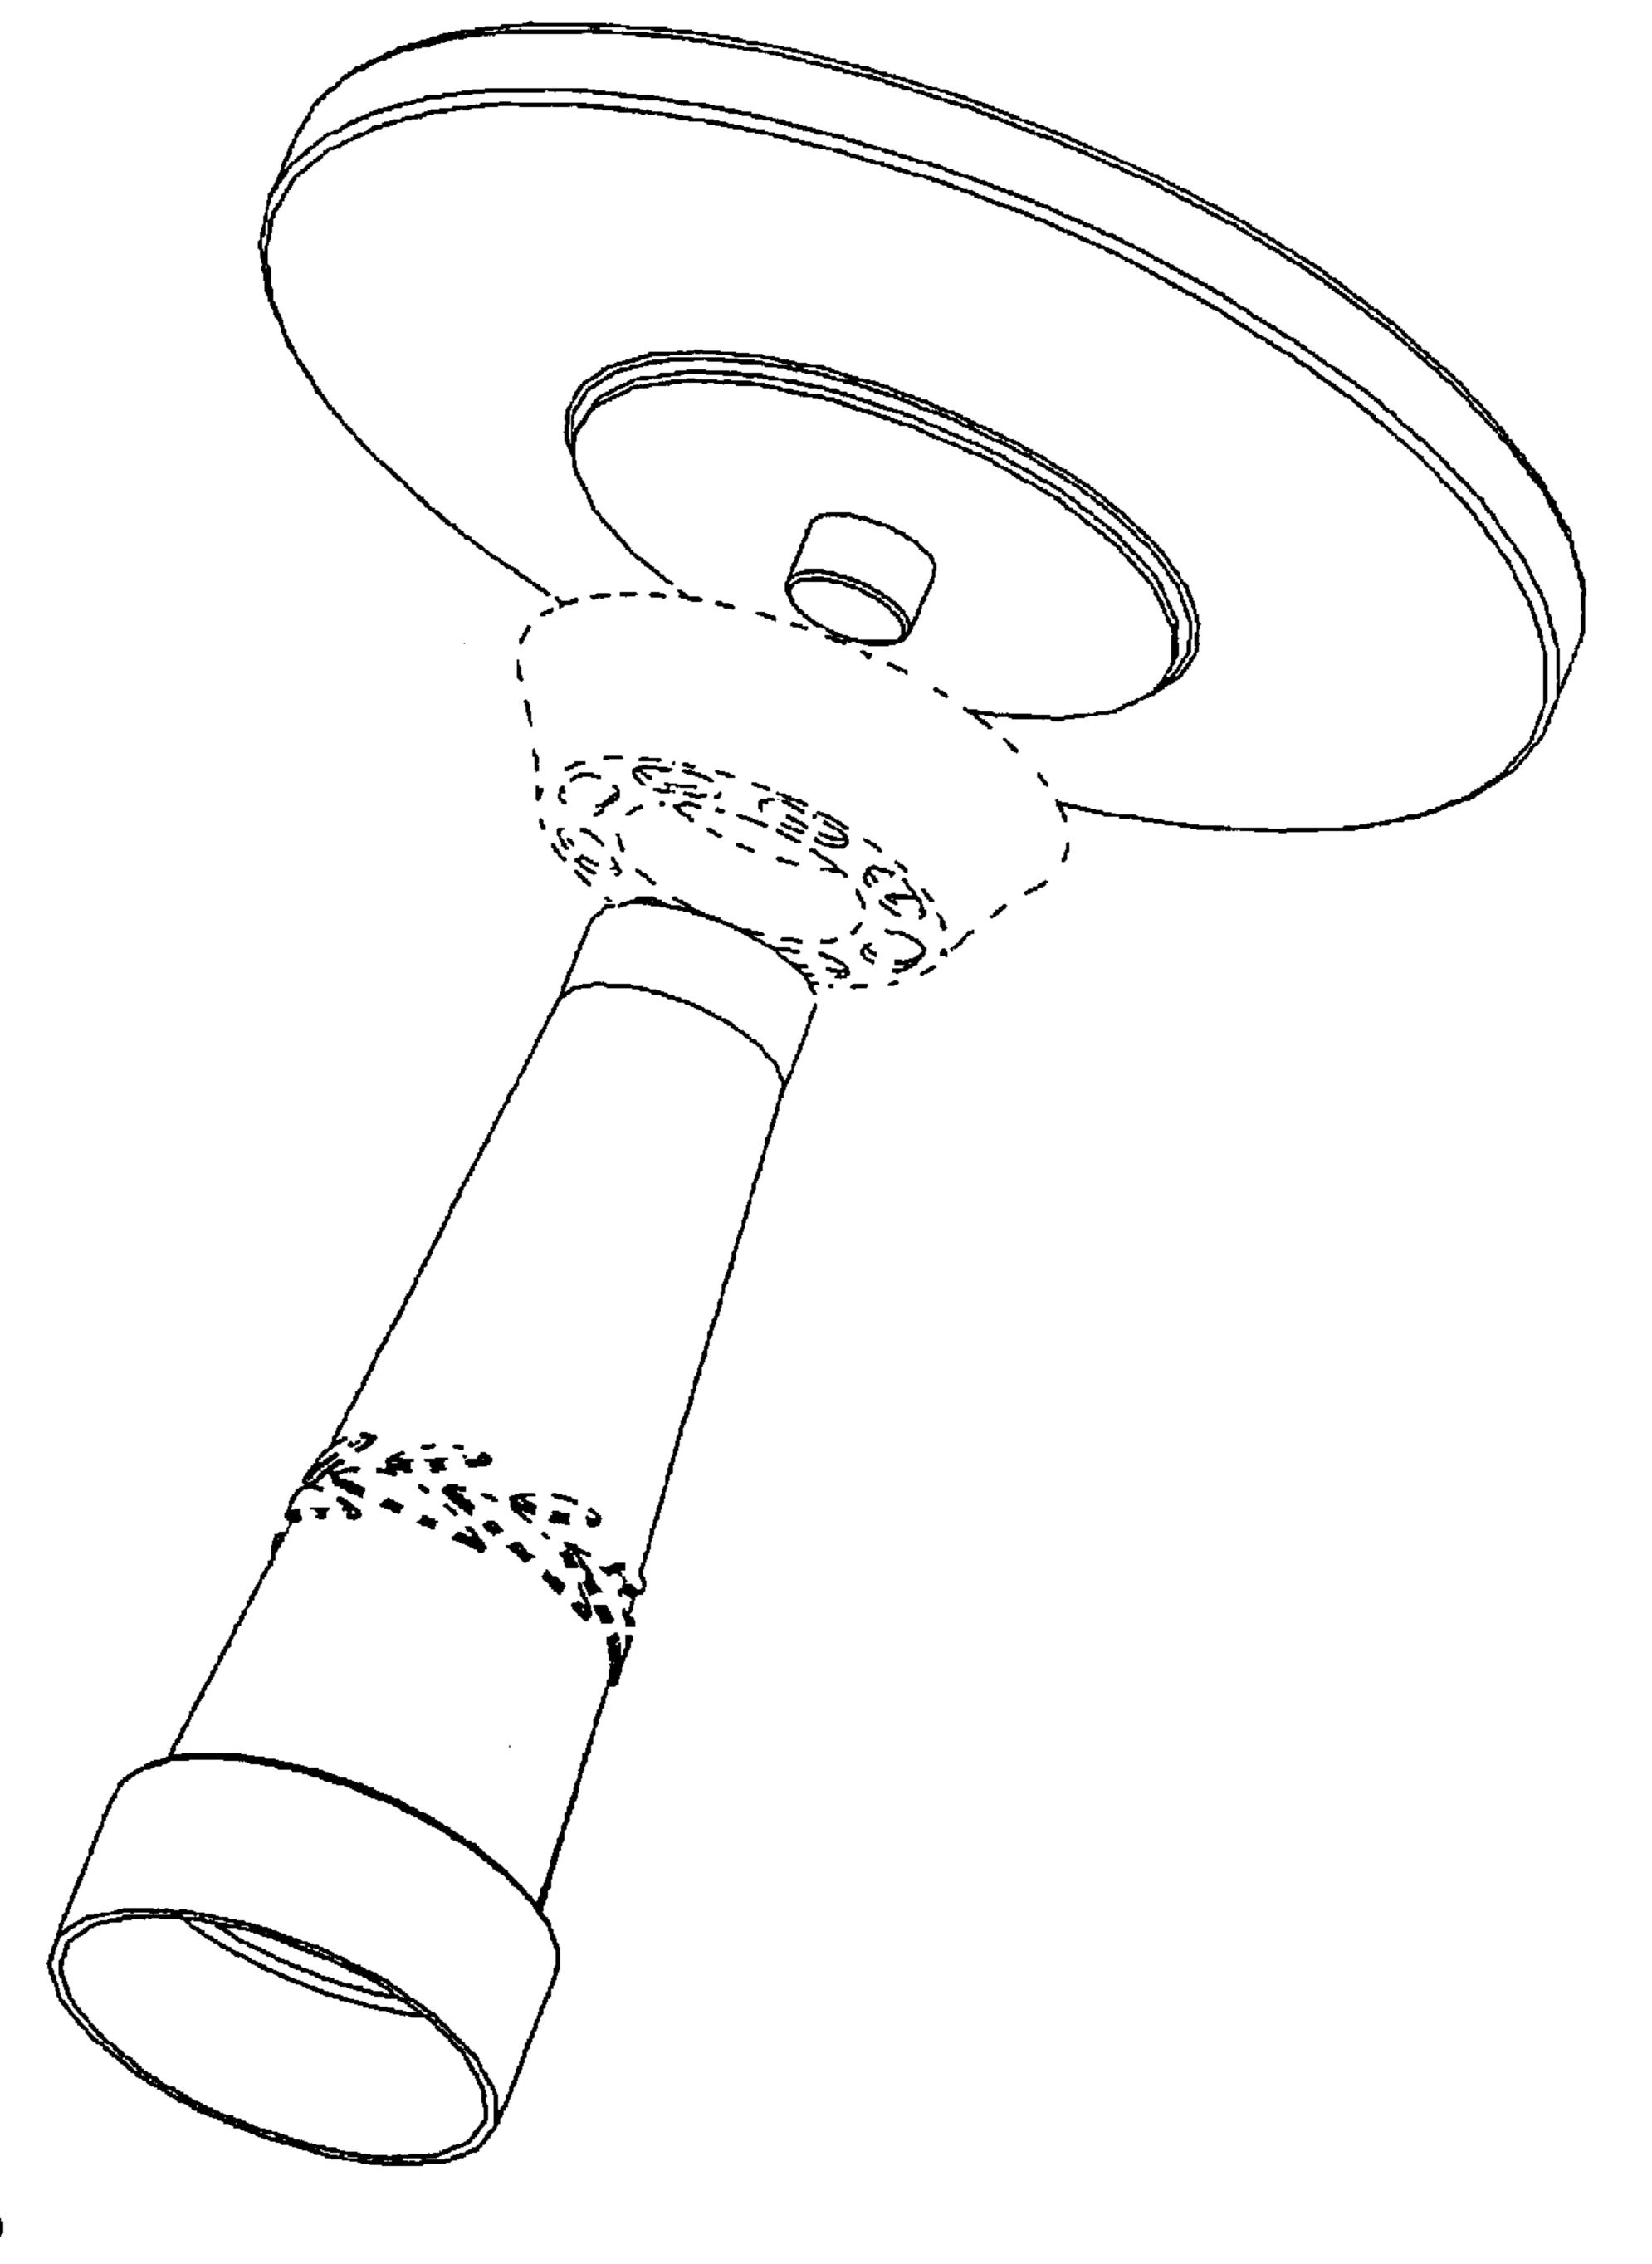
is an exploded side, bottom perspective view thereof; and,
